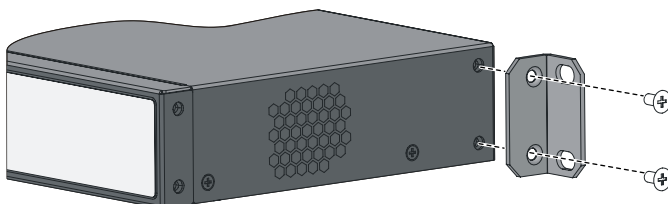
Install a four-holed mounting bracket on the chassis (front mounting)
